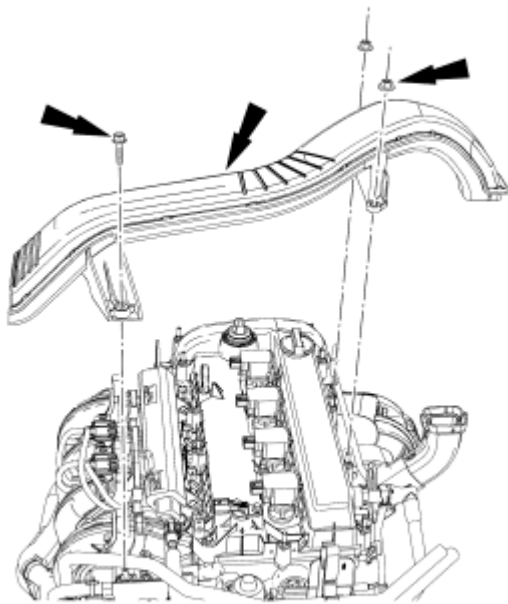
Locating Generator Air Inlet Duct, Bolt And Nuts
